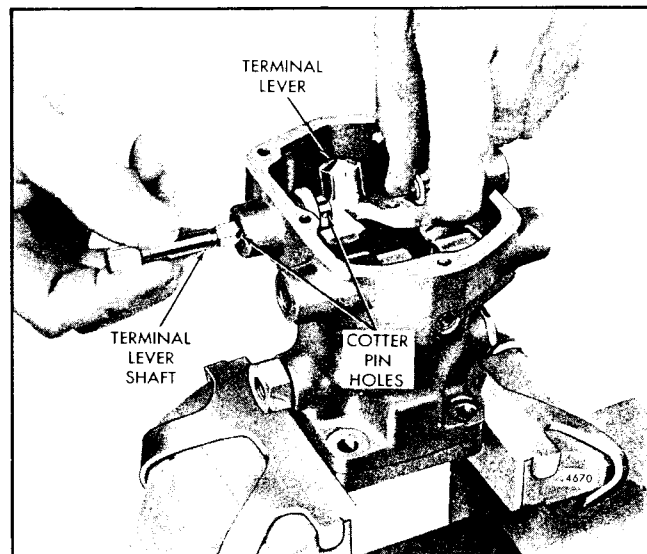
Installing Terminal Lever Shaft in Governor Housing and Terminal Lever
